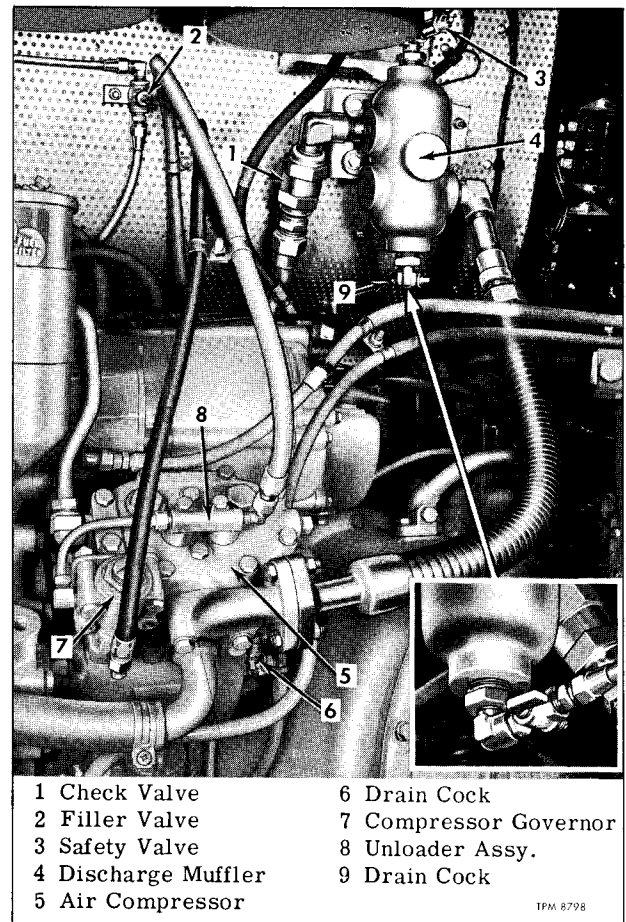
Midland-Ross Air Compressor and Discharge Muffler Installed
